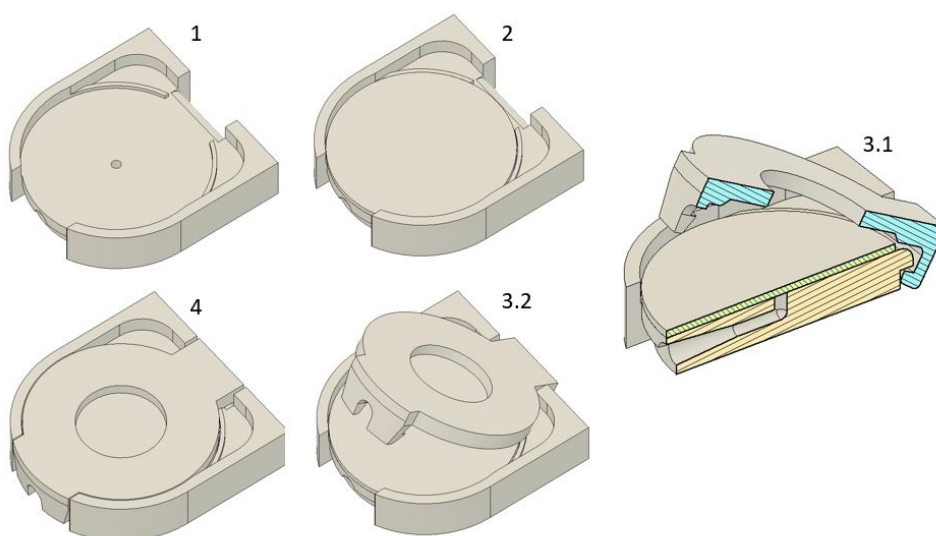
Locator shapes attempted before reaching the final design. Design 1 could not be assembled, as the lug arm is too short to allow for a full rotation around the bottom layer locator. Design 2 addressed this issue, but the sharp corner at the interface between top and bottom layer prevented a successful assembly. Design 3 allowed a smooth and painless assembly process for the user, while providing the correct amount of membrane compression necessary for the functioning of the plasma separation devices.
